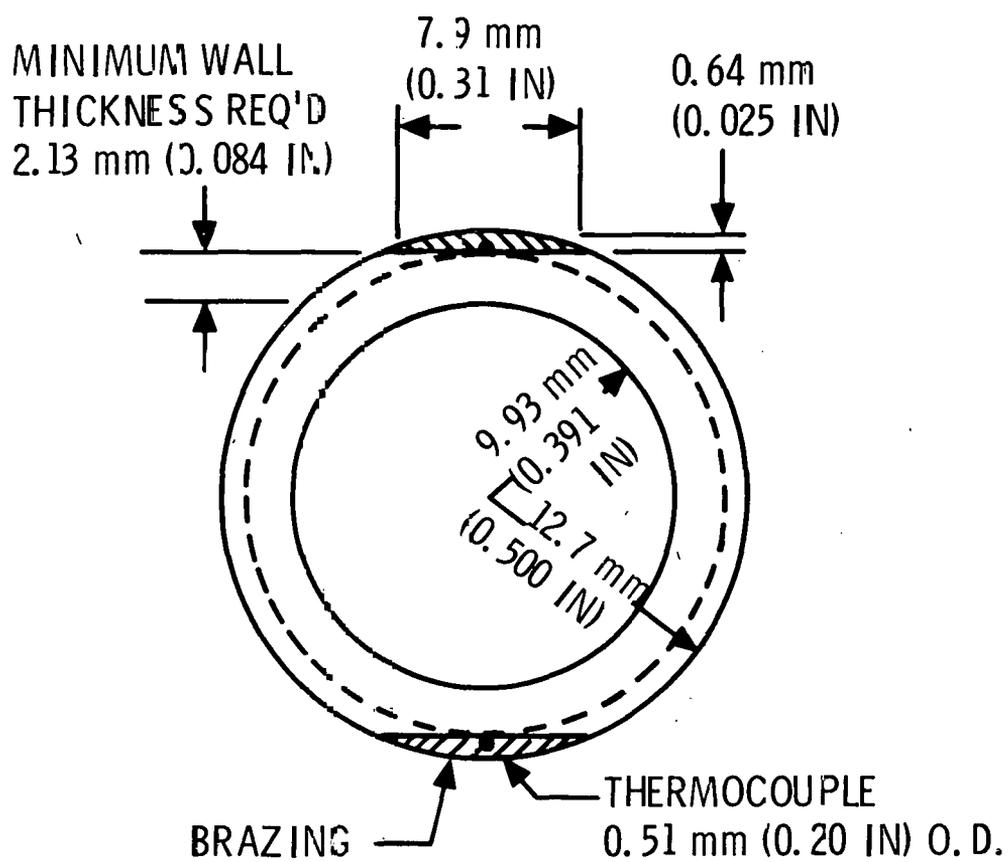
Embedment of Thermocouples in Vaporizer Tube Surface
